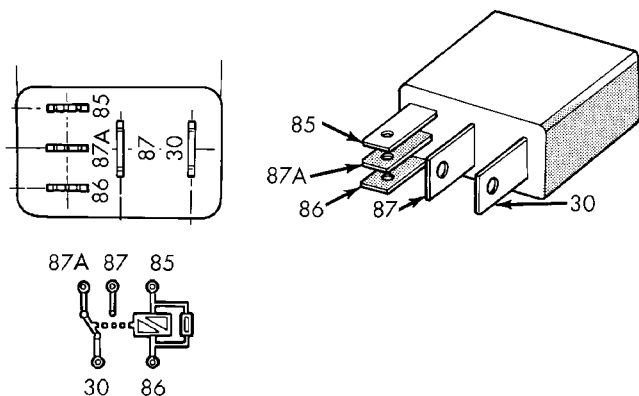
A/C COMPRESSOR CLUTCH RELAY
